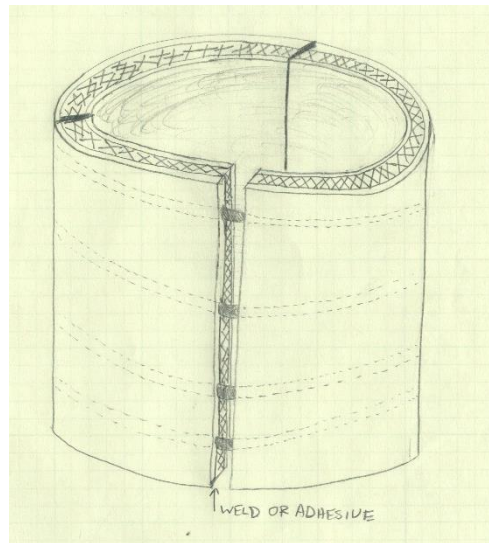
Internal band weld (8a) and internal band adhesive (8b)
